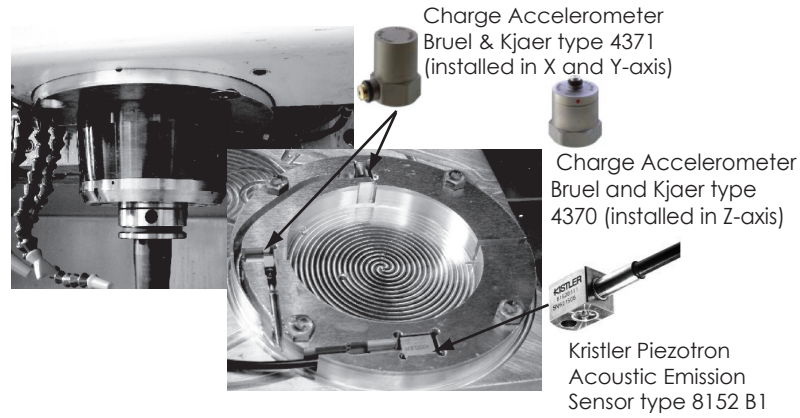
Accelerometers and AE sensors installed on a ring fixed to the spindle of the CNC machining center.
